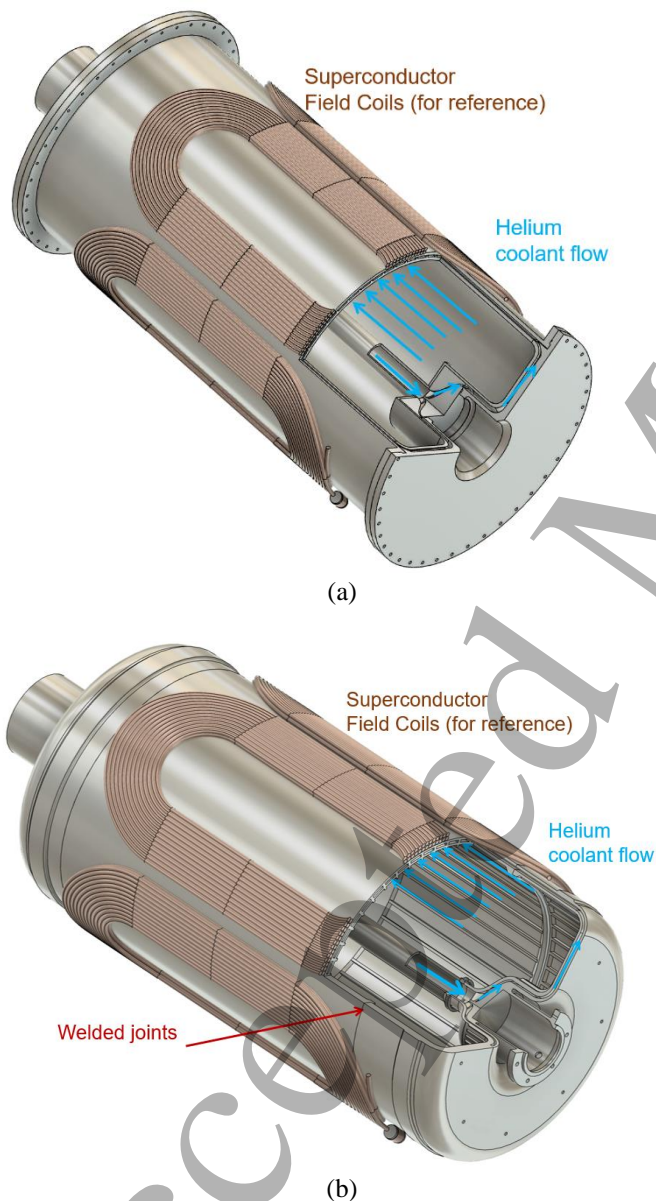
(a) Original rotor cooling structure with bolted joints (b) Rotor cooling structure using A.M techniques
